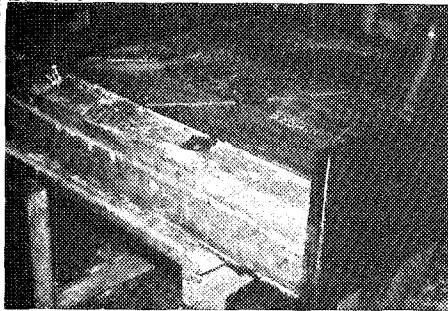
The pattern used for drilling holes in the ironplate and this placed on the piano.
